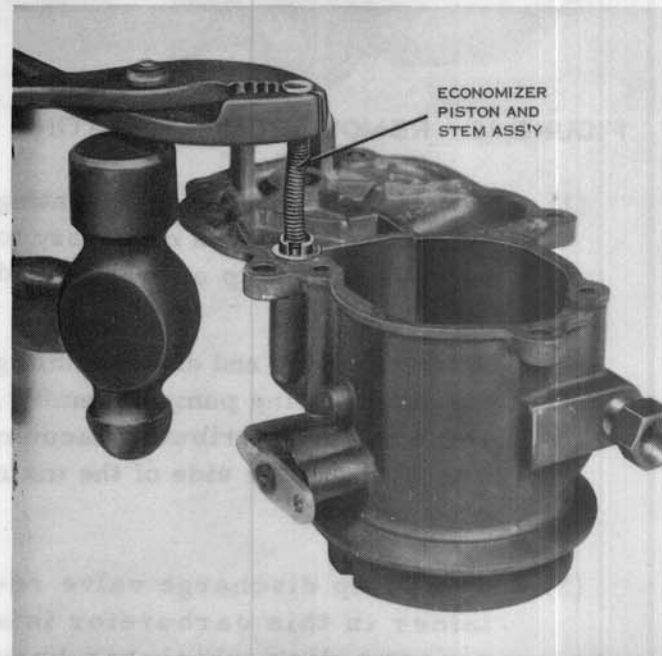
REMOVE ECONOMIZER PISTON & STEM ASSEMBLY
